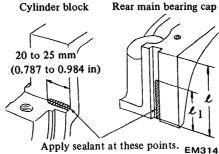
Applying sealant (Main bearing cap and cylinder block)
